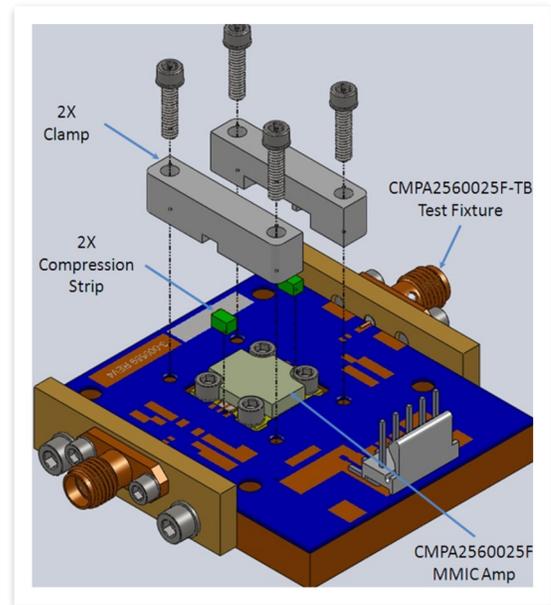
Exploded View of CMPA2560025F MMIC Power Amplifier and CMPA2560025F-TB Test Fixture
